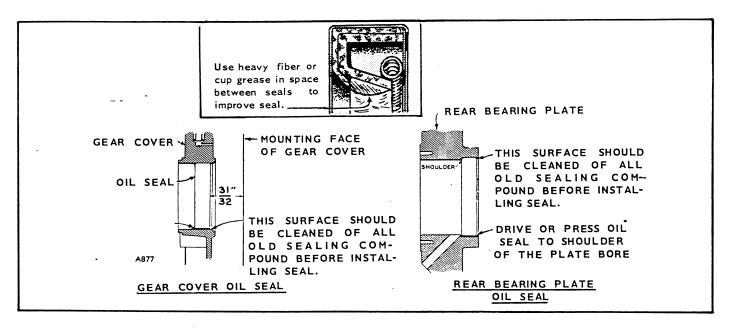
GEAR COVER AND REAR BEARING PLATE OIL SEALS
